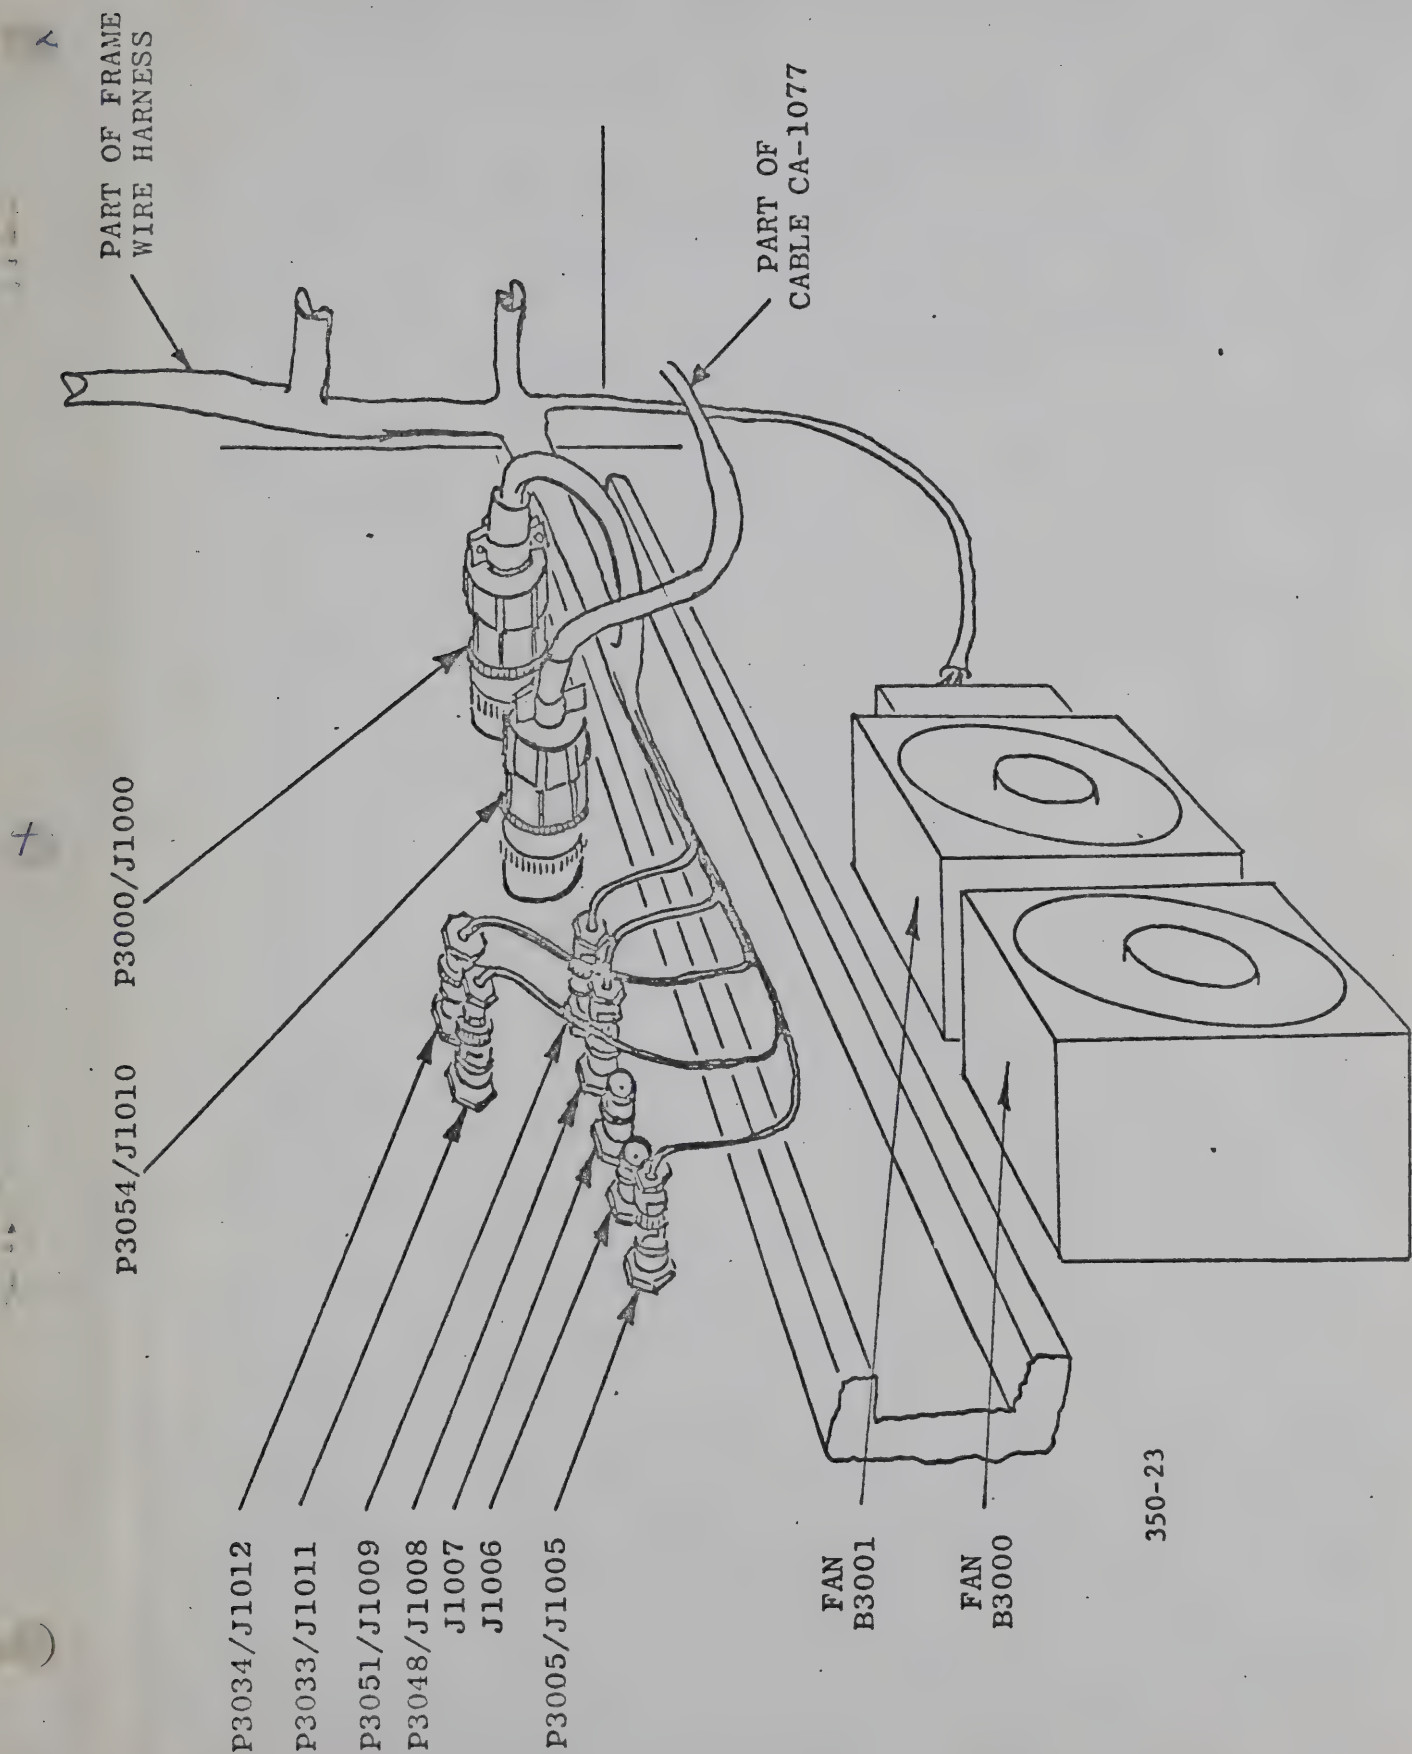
Detailed Part of Inter-Frame Cabling, Cable Connection Diagram
